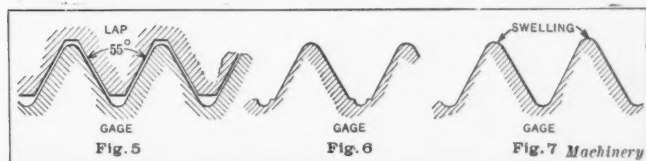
Lap for Angle of Thread. Fig. 6. Exaggerated Thread Form after lapping Top of Gage Thread. Fig. 7. "Swelling" on Top of Thread
